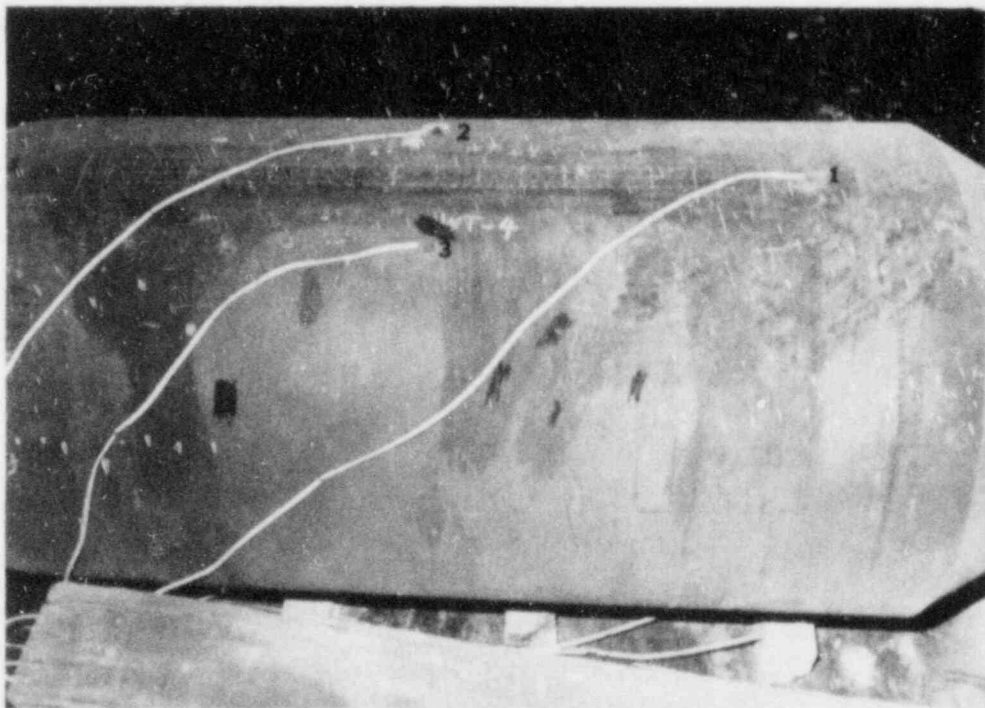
Thermocouple Locations Around the Vessel Seam Test Weld
